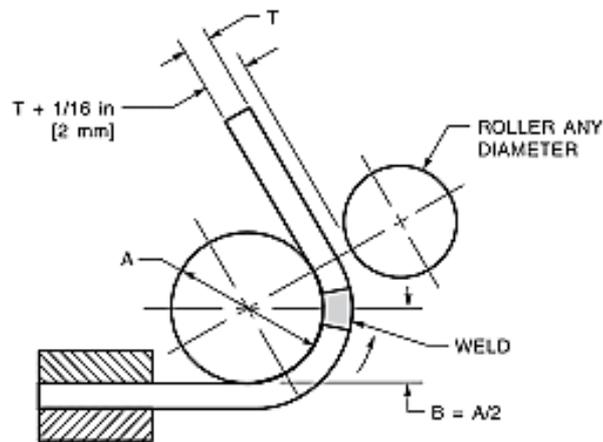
Guided Bend Test Jig (see 4.9.3.1)
